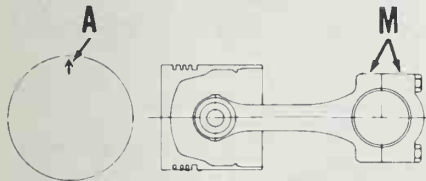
Assemble rod, cap and piston so marks (M) on rod and cap are on same side as piston arrow (A). Install in engine so marks (M) and arrow (A) are up.
